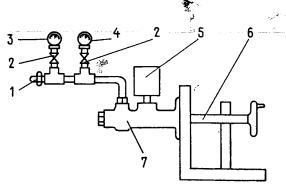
Checking Front Sealing Ring for Tightness:
